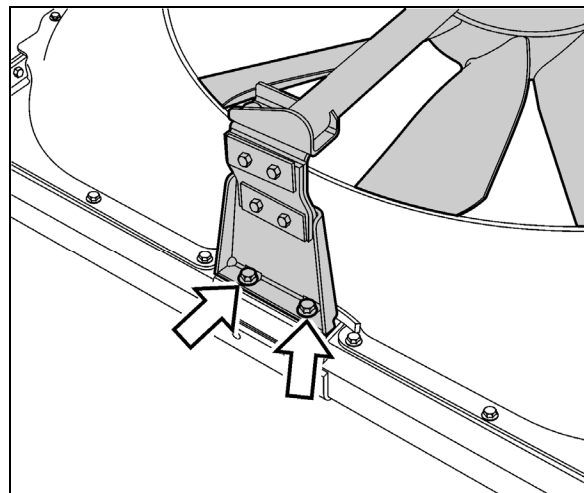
REMOVING UPPER FAN DRIVE SUPPORT BRACKET
